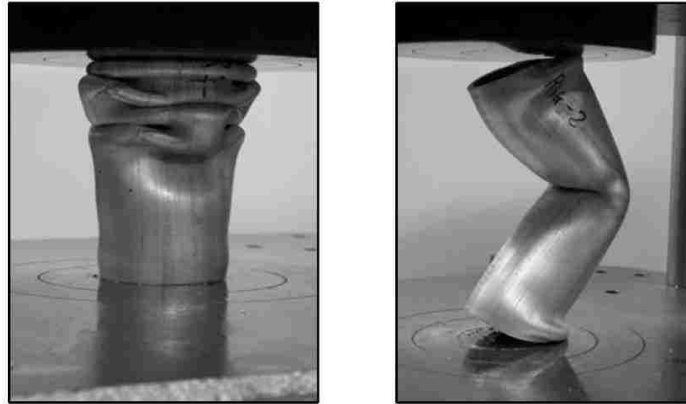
Axial crushing of circular AA6061-T6 aluminum tubes by progressive folding (left) and global bending (right) [11].
